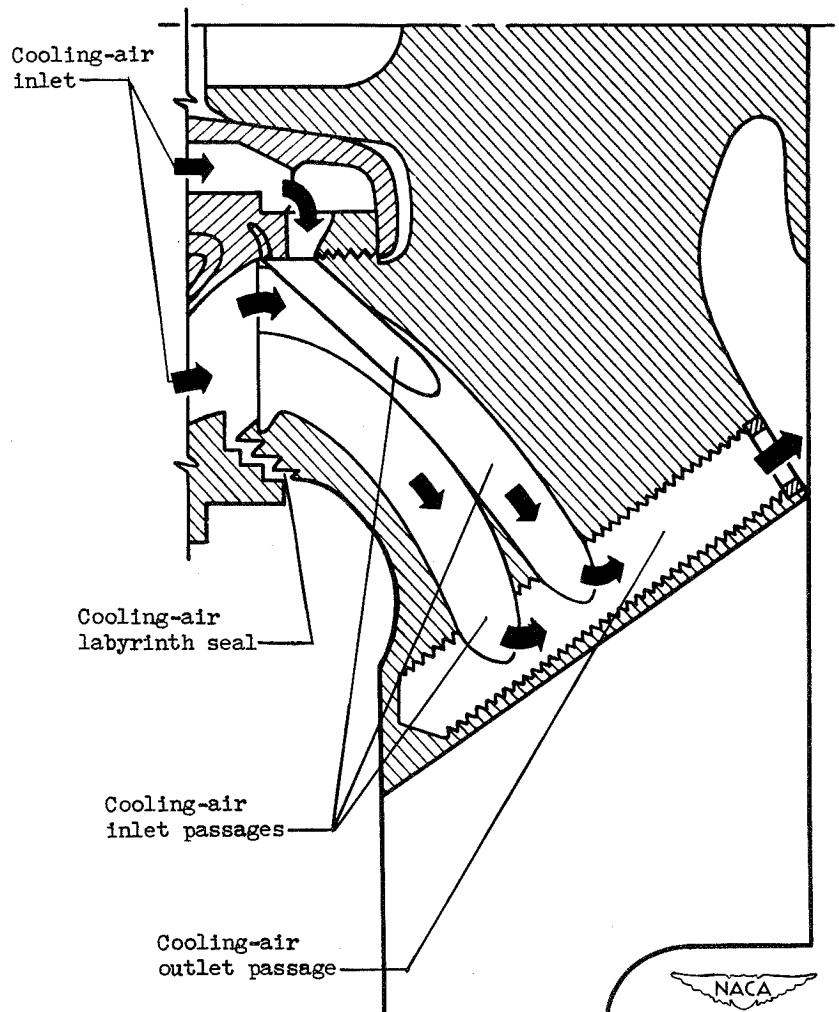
Cross-section of radial-flow turbine wheel showing cooling-air passages.
